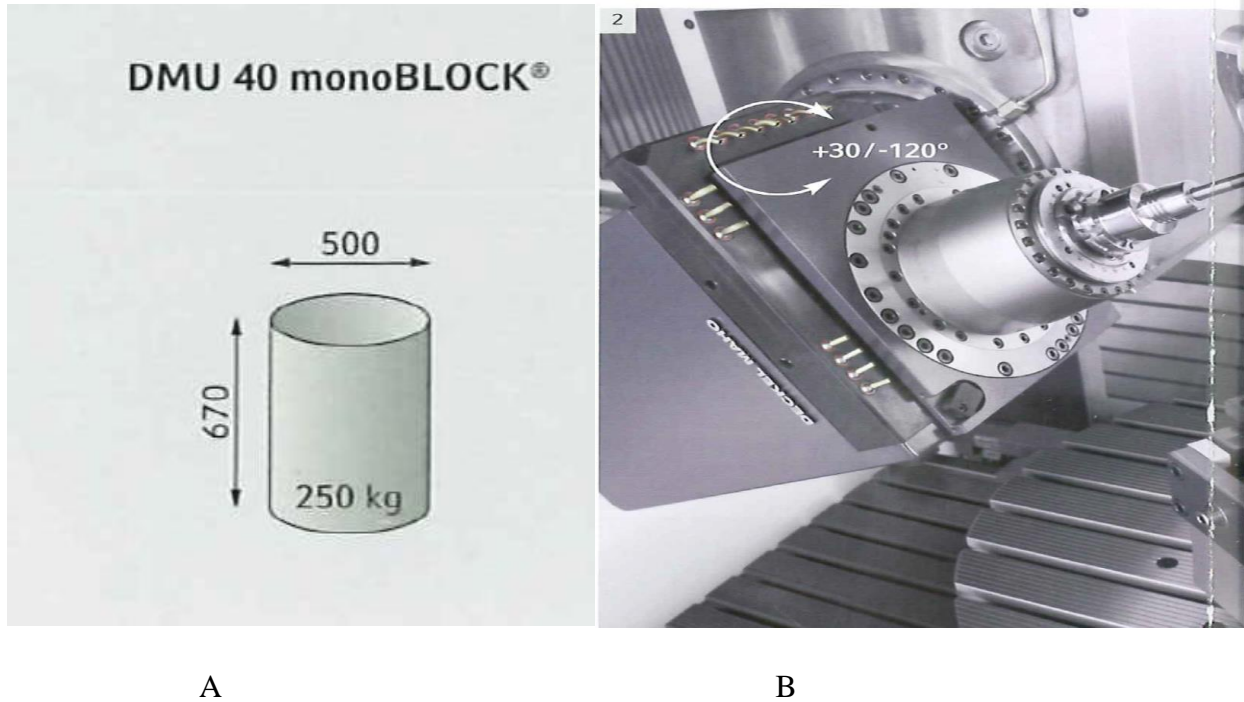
A: maximum workpiece dimension/ weight (HSK-A63), B: machining of a long landing gear support beam with a b-axis and negative angles
